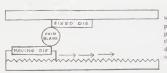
Schematic drawing of the starting position of a blank when it is about to pass between the fixed and moving dies in the Castaing machine. Here the moving die is completely retracted into its normal starting position and the blank will receive a complete set of edge letters.
